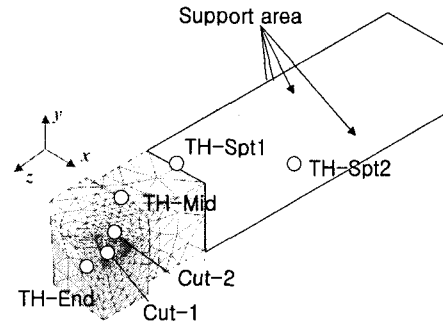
The model of a tool holder and a PCBN cutter for numerical simulation
